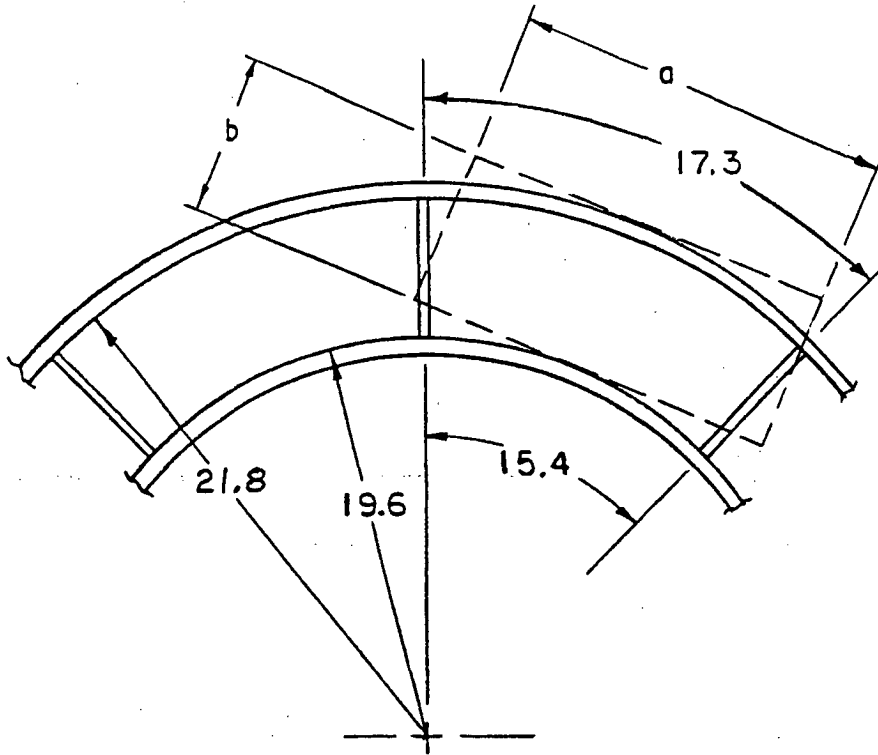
Expansion Tank Stiffener Load Geometry
